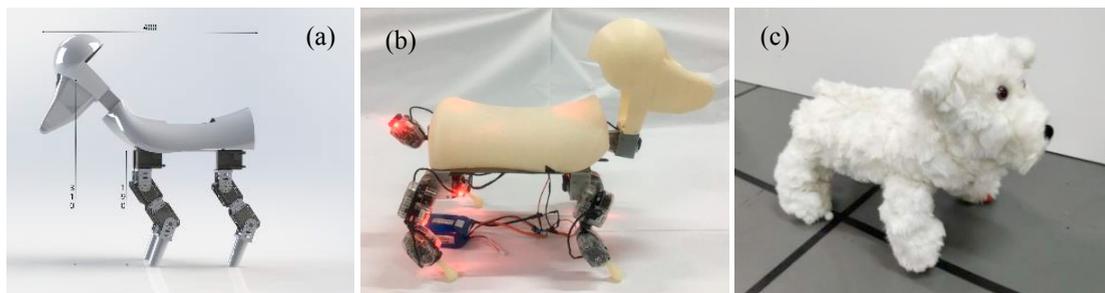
Mechanical hardware design of the robot platform.-CAD design (a) bare mechanical frame without cover (b) and with soft fur covers (c) of the platform. The cover can be easily removable for washing and cleaning.
